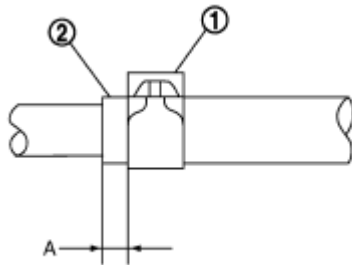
Identifying Fluid Cooler Hoses Dimension
